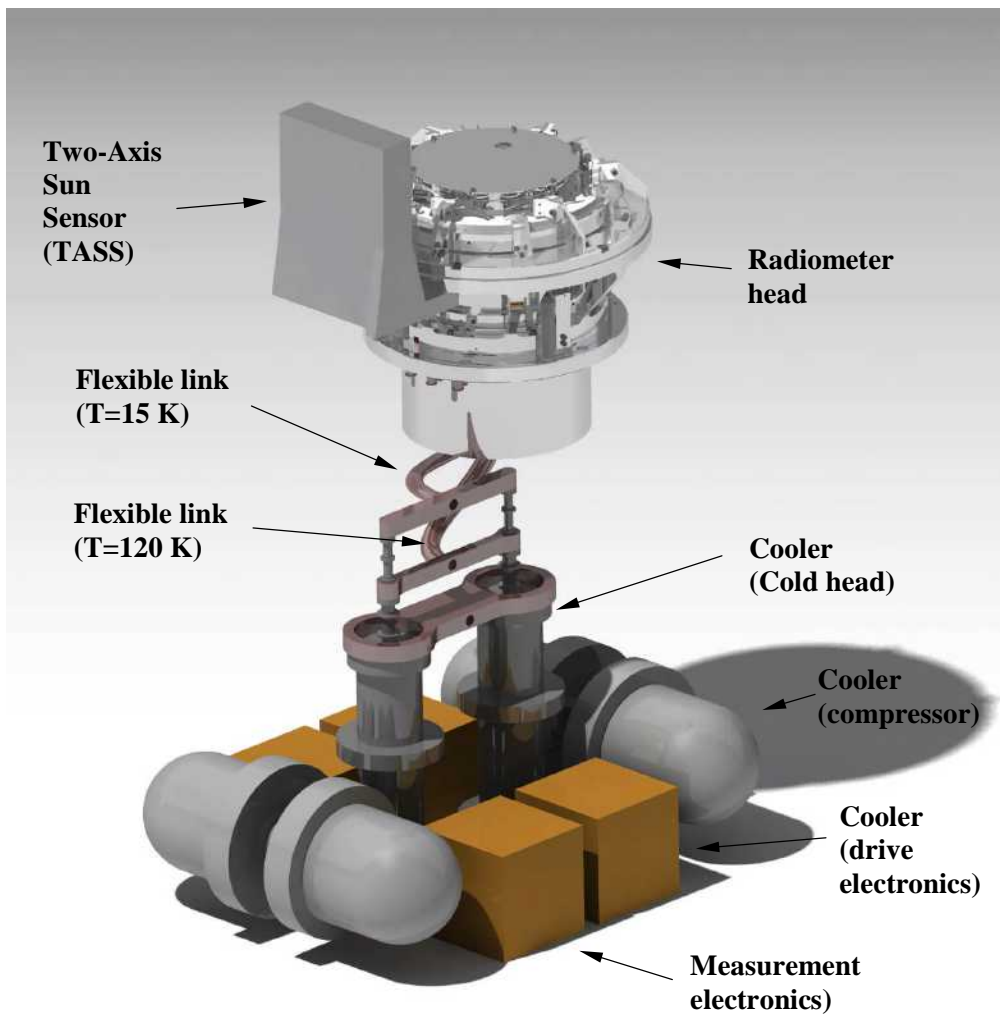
CSAR radiometer head connected to space-cooler via flexible braids - 3D model of the most important elements. A cryostat will be required in addition to various cooled shields to protect the instrument and the cooler.
